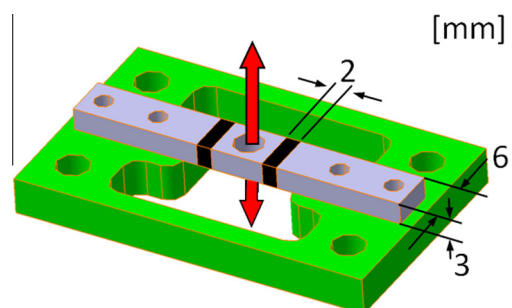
Test specimen. Rubber compound vulcanized between three steel pieces. Displacement applied on middle piece.
